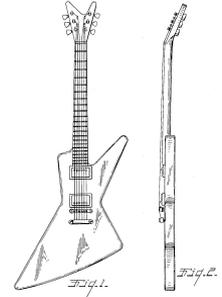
is a top plan view of a stringed musical instrument showing my new design, and
